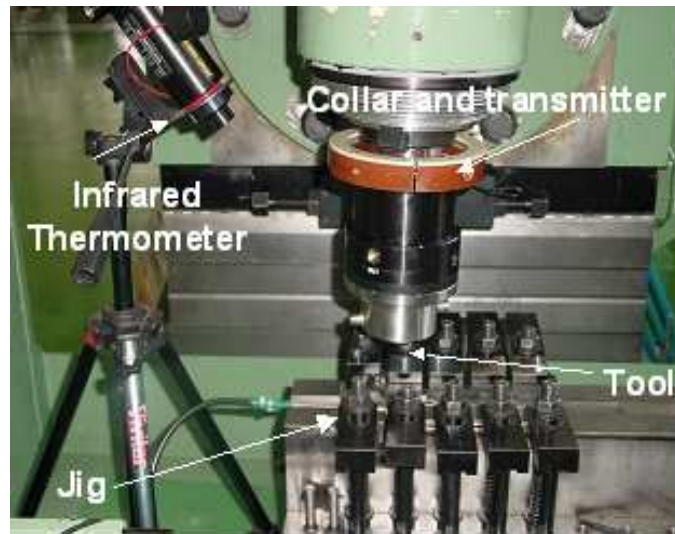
1 Experimental set-up for FS Welding and details.
